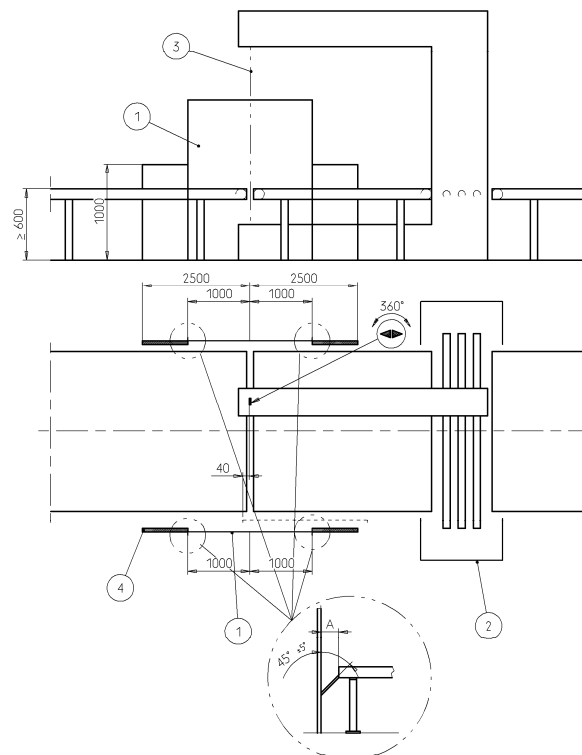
Horizontal bandknife cutting machine for bottom trimming
